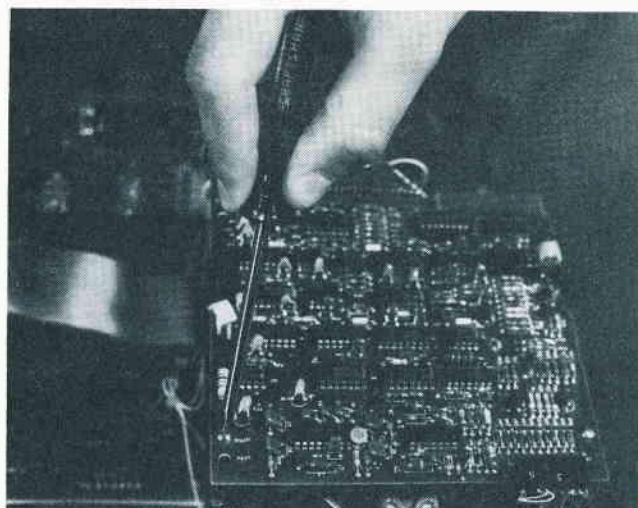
Remove the two Phillips screws holding the analog card on the drive mechanism.
